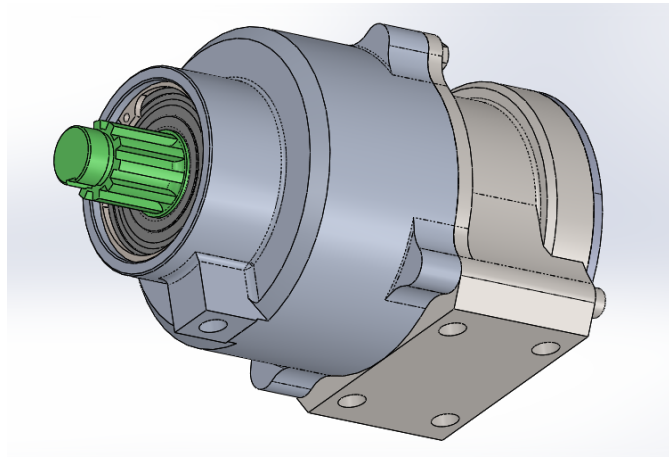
final version of the housing assembly: single piece planetary case, flat surface for fixing on test bench
